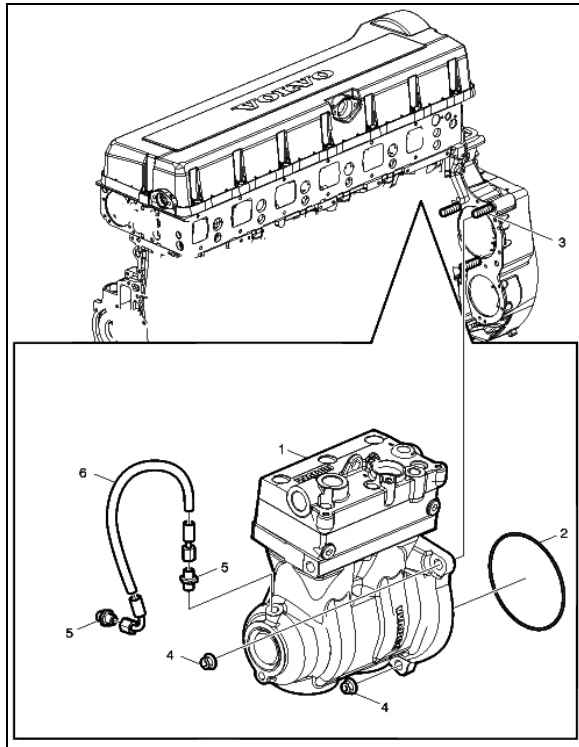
AIR COMPRESSOR LOCATION 03061
